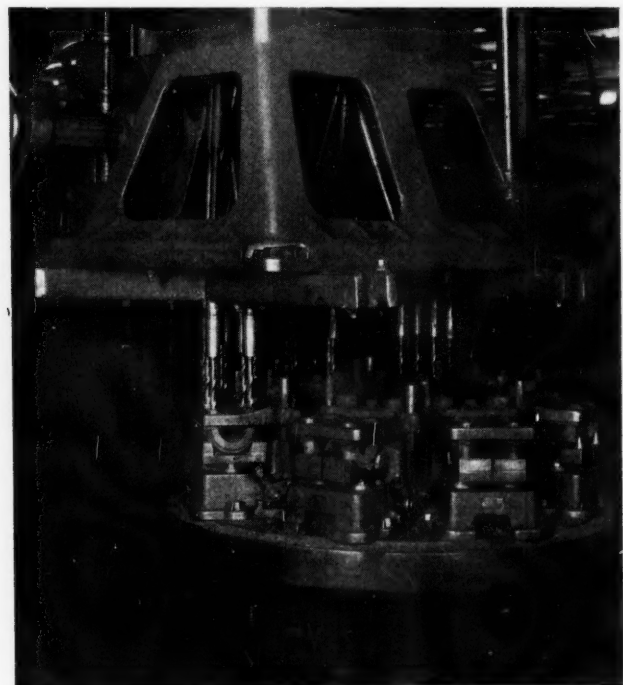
A 30-spindle multiple drill press used to drill all bolt holes in a complete set of bearing caps.
